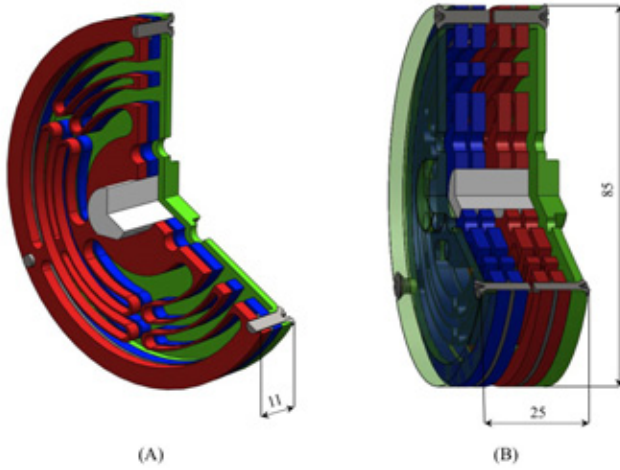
(A) Section view of a parallel configuration of two basic elastic modules. The elastic modules are shown in red and in blue, the output shaft connecting the internal rings of the springs with the load is shown in white, and the flange connecting the external rings of the modules and the gearmotor is in green. Using the basic element (specs reported in Tab. 4), the equivalent output stiffness is 196 N·m/rad and the max supported torque 15.36 N·m. (B) Section view of a design including the series connection of two parallel modules packs (shown in blue and in red). The white shaft connects the internal rings of the two modules packs, while the green flanges, acting as input and output ports of the elastic system, connect the external rings of the two modules packs. The equivalent stiffness between input and output is 98 N·m/rad and the maximum supported torque 15.36 N·m.
